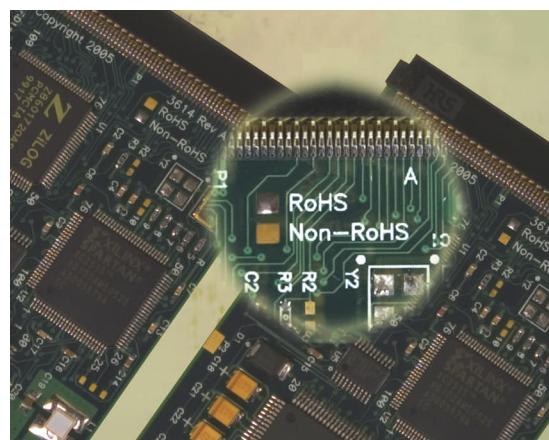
Solder on a pad indicates whether a board is RoHS compliant. Courtesy of Sealevel Systems.
